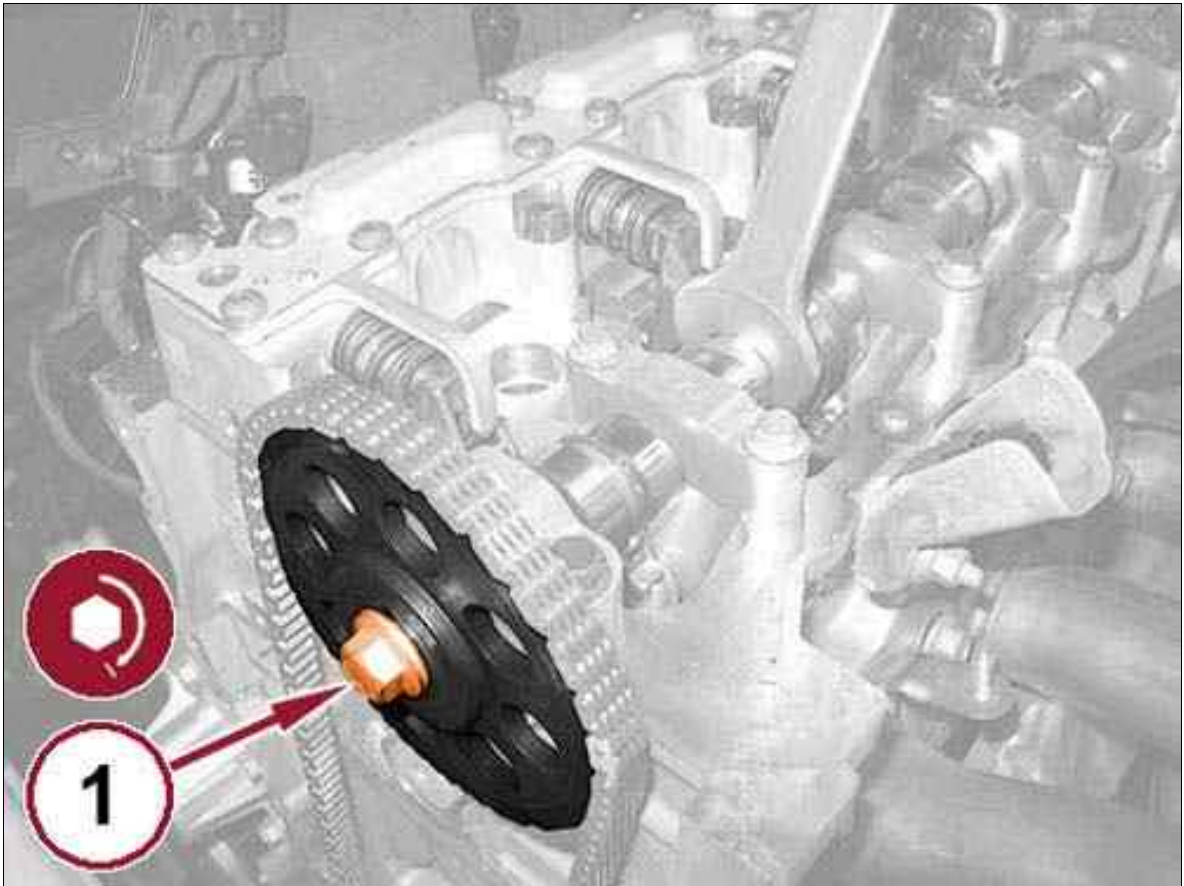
Matching Camshaft Sprocket Gear Notch To Marked Link
